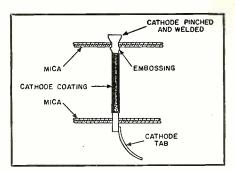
Inverted-pinched-welded construction which insures a tight fit between a cathode and the supporting mica plates.
